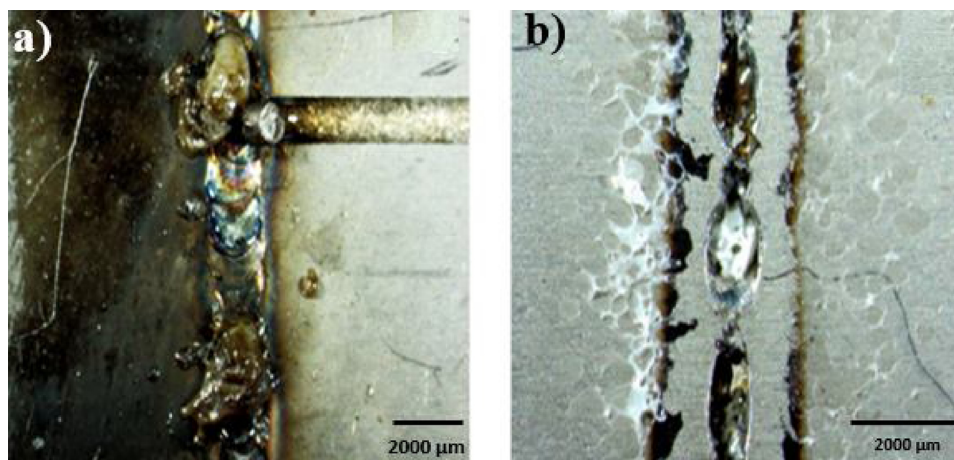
a) Image of the upper surface of metal and weld bead, b) Image of the lower surface of the polymer.
